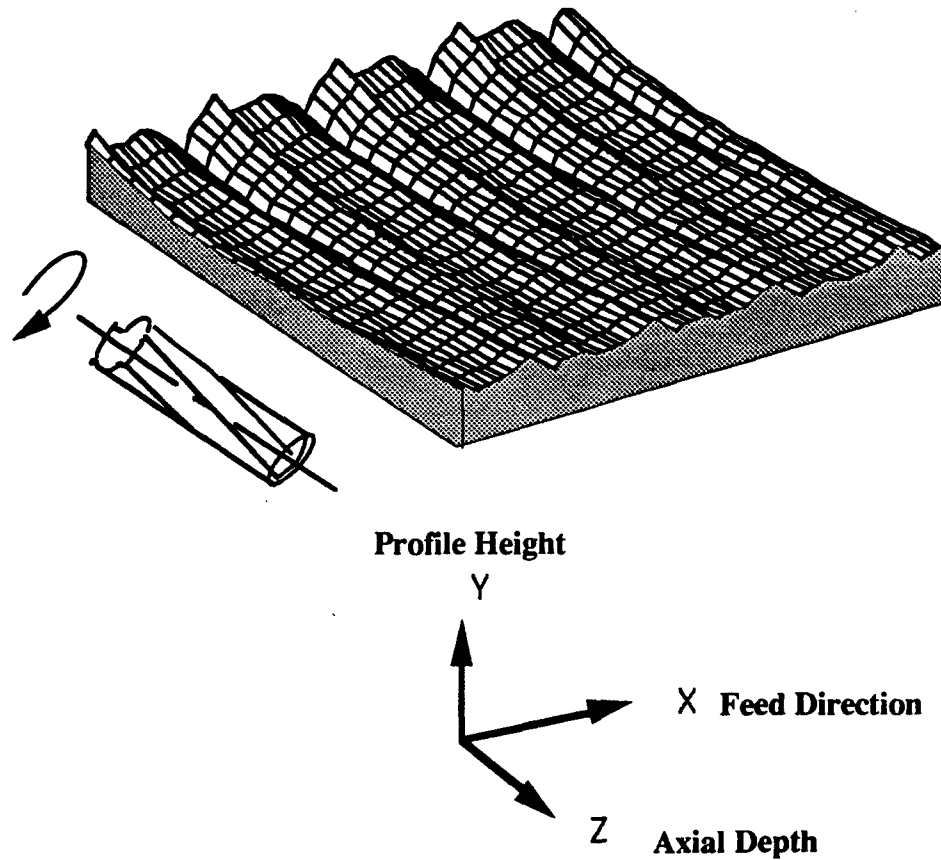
The 3-D geometry of end milled surface by using the FEM
